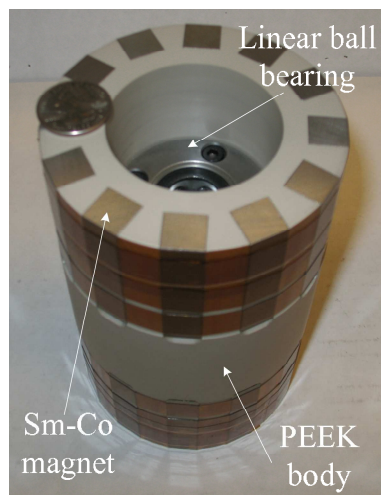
Fabricated displacer piston with embedded linear motion ball bearing and permanent magnet arrays.
